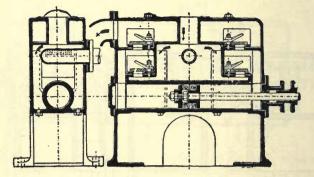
, 863.-Horizontal Air Pump and Condenser, with Rectangular Valves and Injection Nozzle, and Exhaust Inlet below the Barrel.
